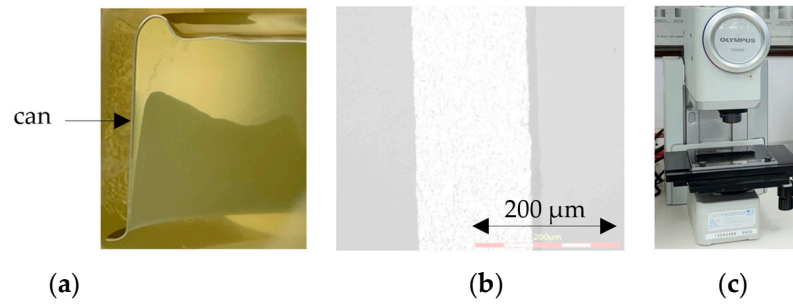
Thickness measurement: (a) molded specimens; (b) 250× image; (c) digital microscope.
